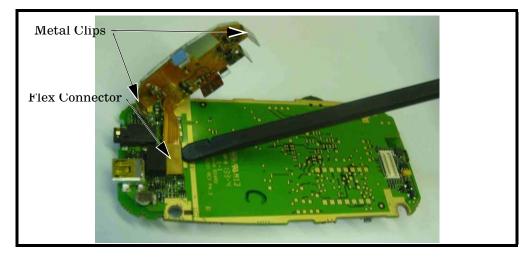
Disconnecting the Stand_Joystick Assembly from the Transceiver Board
